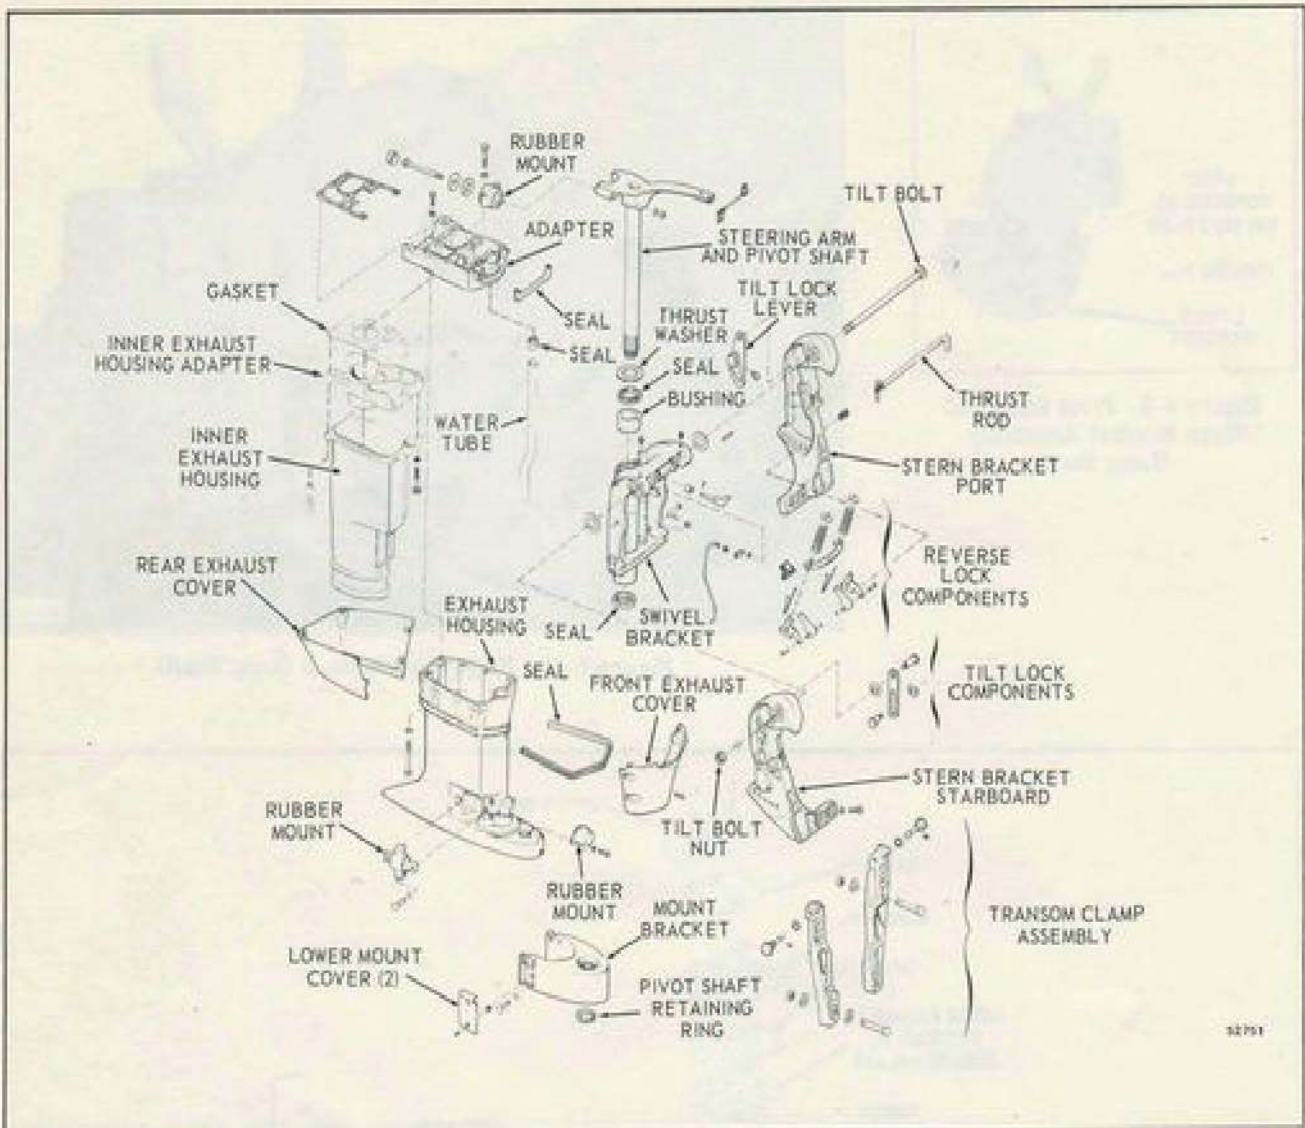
Exhaust Housing, Adapter, Stern and Swivel Brackets (Short Shaft)
